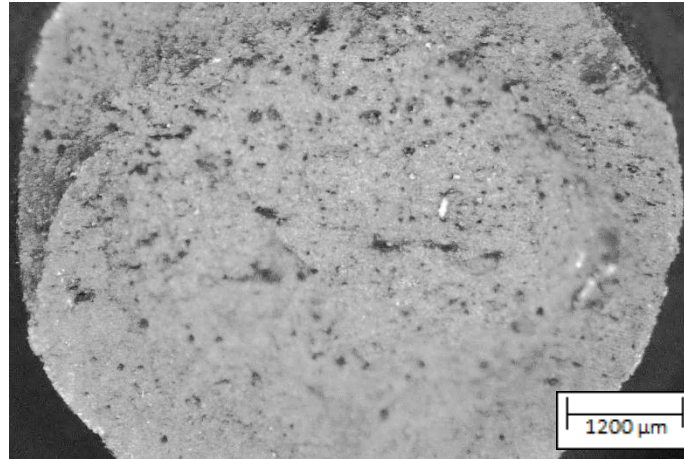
Stereoscopic image of the reduced section tensile test specimen of sample 4 (Material was tested in the service exposed condition with no further welding or heat treatments performed in order to establish a test baseline) RA = 74%
